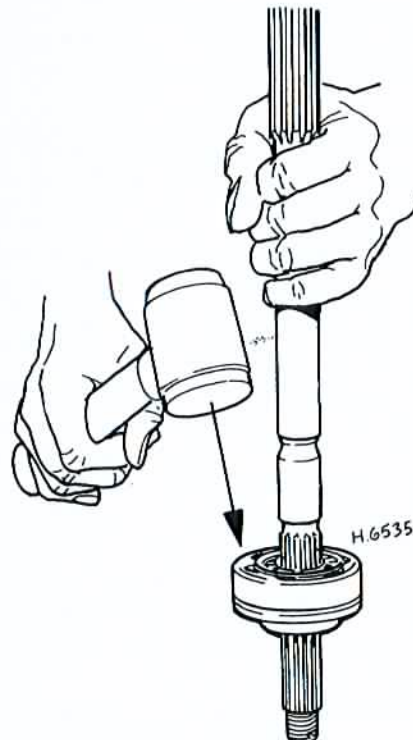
Using a soft-faced mallet to remove CV joint (Sec 5)
